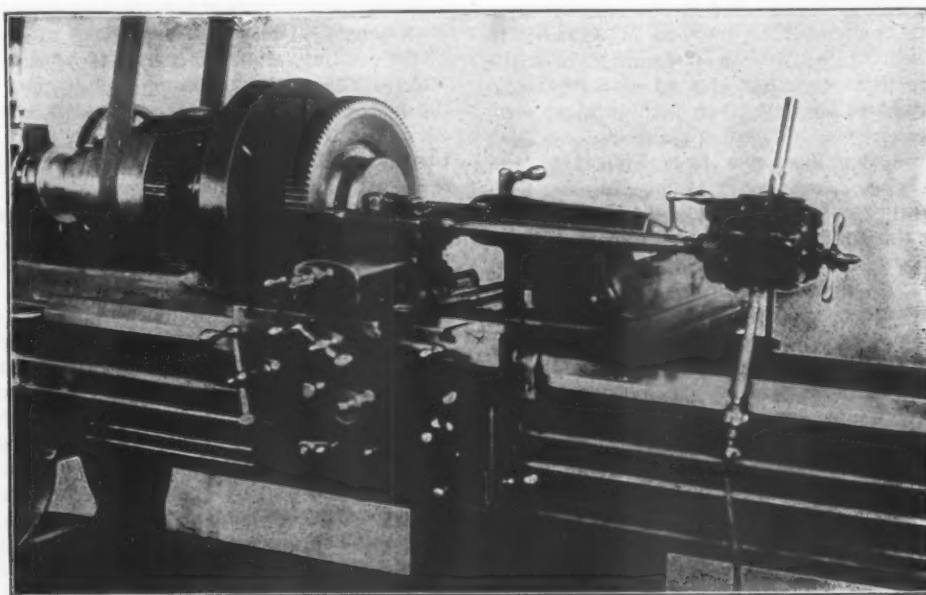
The Fixture by Which the Milling Cutter and Air Drill Were Held in the Lathe.
